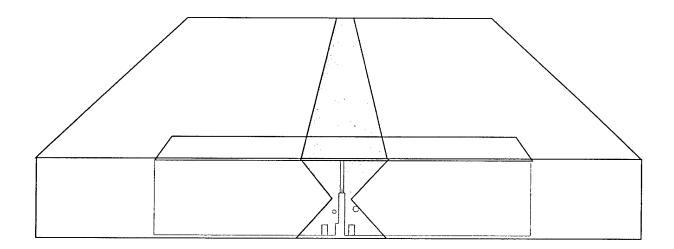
Orientation of SE(B) specimens relative to weldment.
